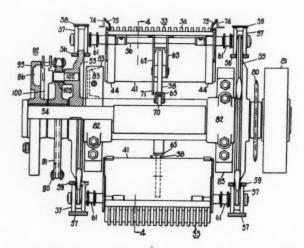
Because of the relatively few teeth in the sprocket wheel a compensating drive is employed
